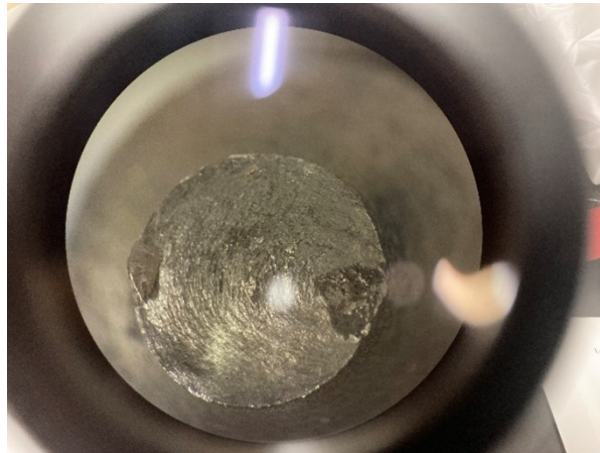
Fracture Surface of Unheat-treated 3D Printed Inconel 718
